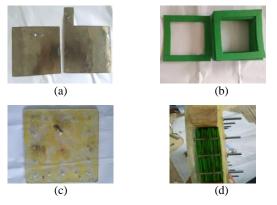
(a) Stainless Steel Electrolyser Plates (13 total) (b) Soft Gasket Spacers Rings (14 total) (c) PVC End Plate with Gas Valve Attached (d) Assembled Stack
